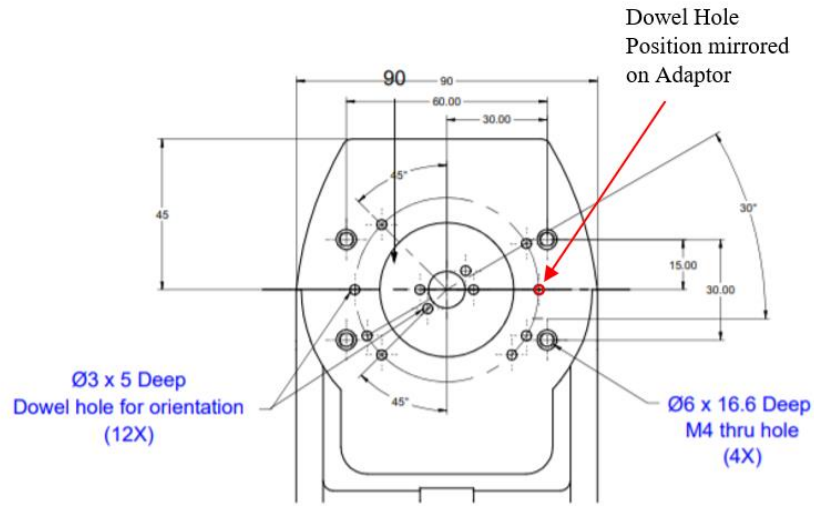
Crosshead Mounting Dimensions [26] © Illinois Tool Works Inc.
